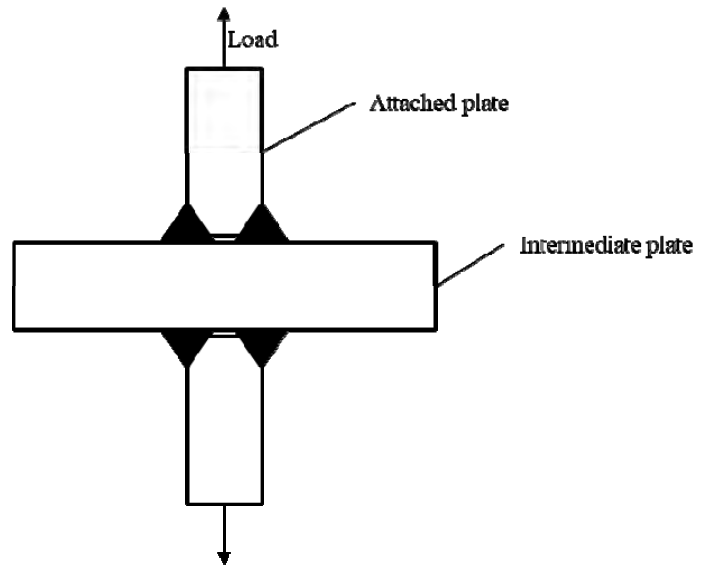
Parts of Continuous Fillet Weld
